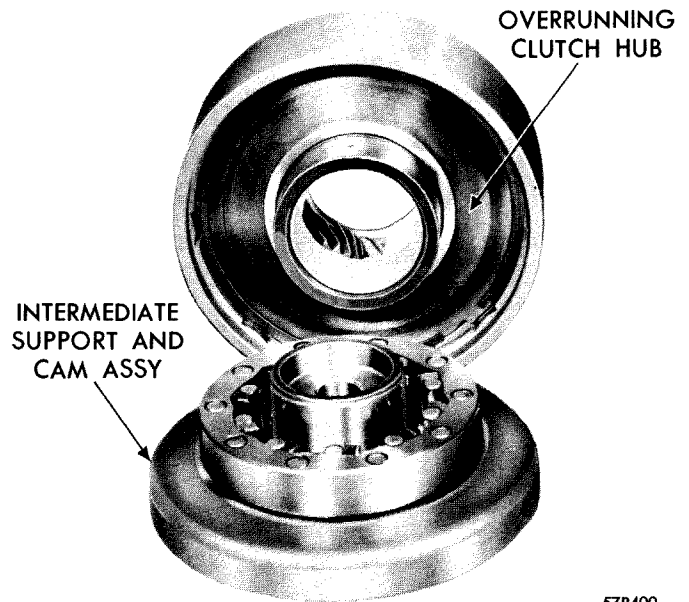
Removal and Installation of Intermediate Support and Cam Assembly from Overrunning Clutch Hub
